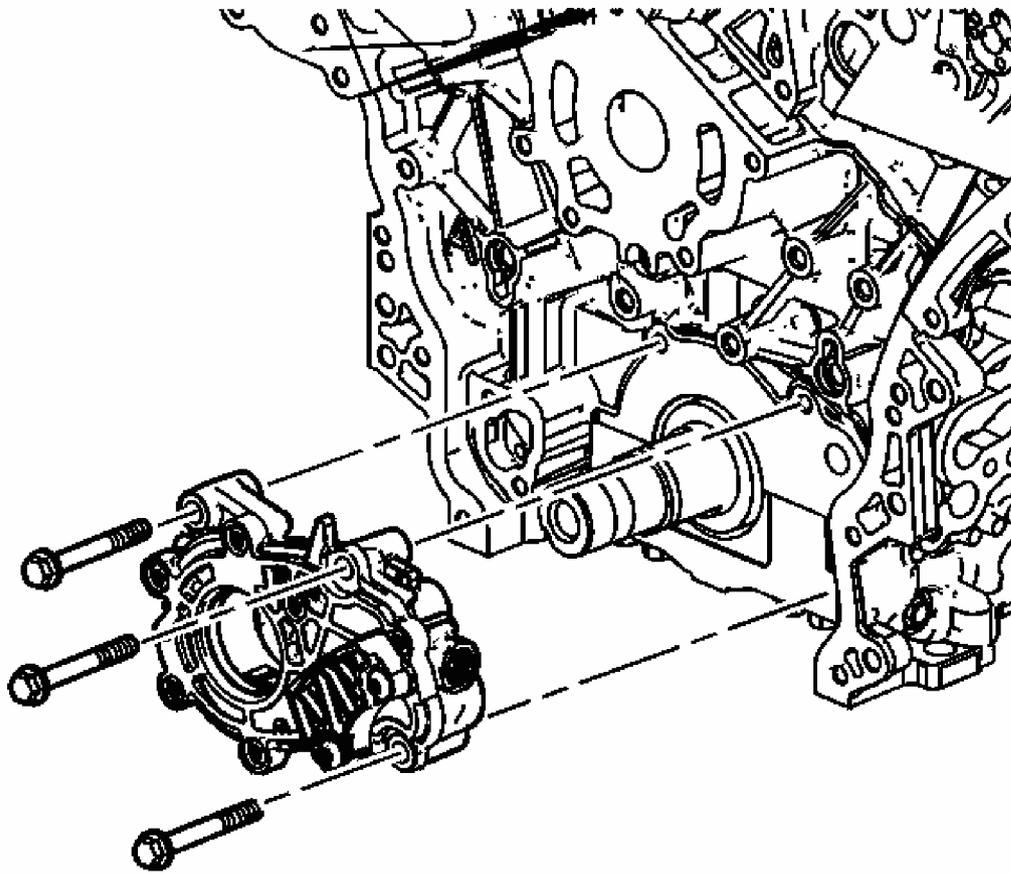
View Of Oil Pump & Mounting Bolts
